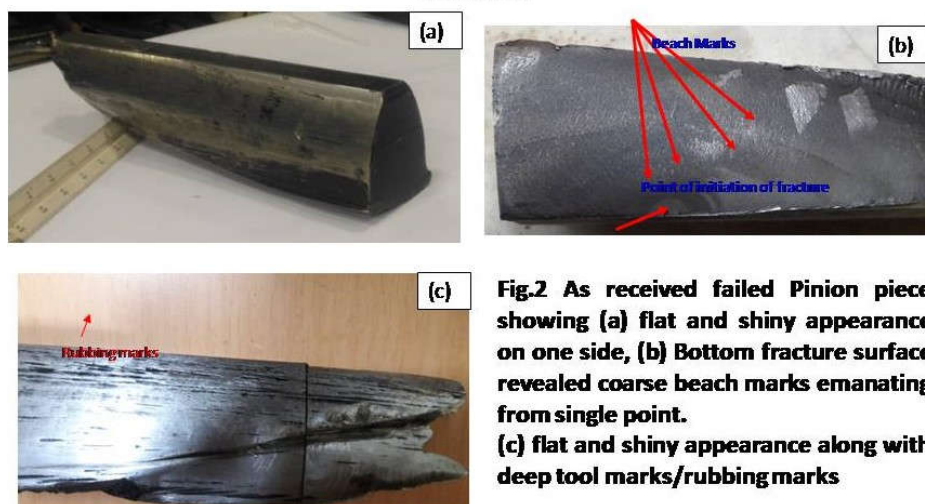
As received failed Pinion piece showing (a) flat and shiny appearance on one side, (b) Bottom fracture surface revealed coarse beach marks emanating from single point. (c) flat and shiny appearance along with deep tool marks/rubbing marks
